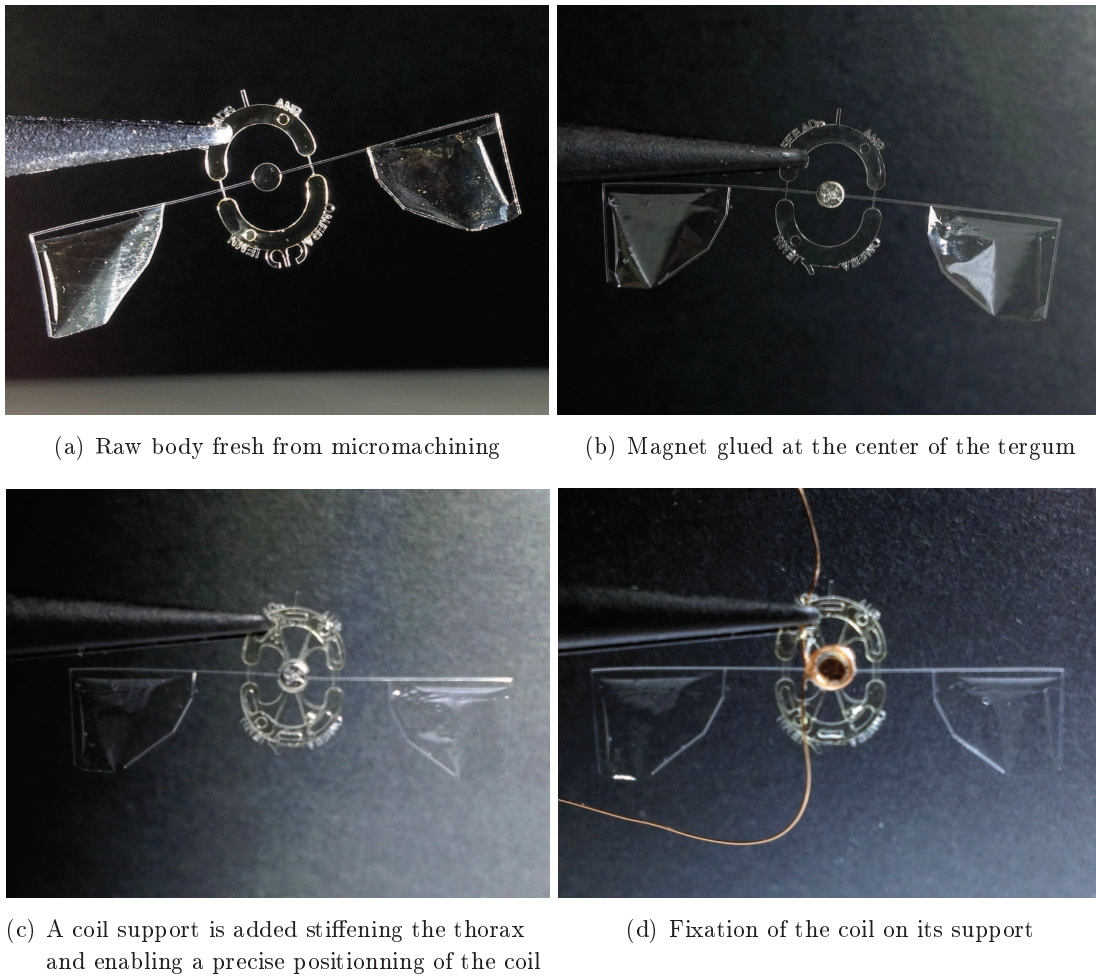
Assembly procedure of an OVMI prototype in 4 steps using a simple binocular and some glue. The assembly process is thus quite simple and a prototype is rapidly assembled and tested.
